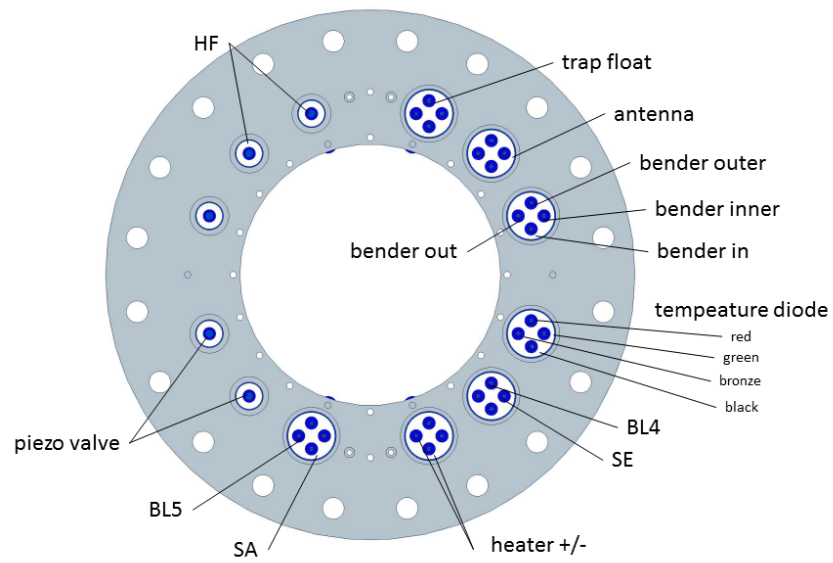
Technical drawing of the feedthrough-flange for the 22-pole trap.
